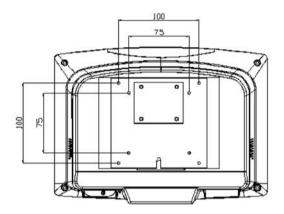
The Rear View of ONYX-BE100 Bedside Terminal
